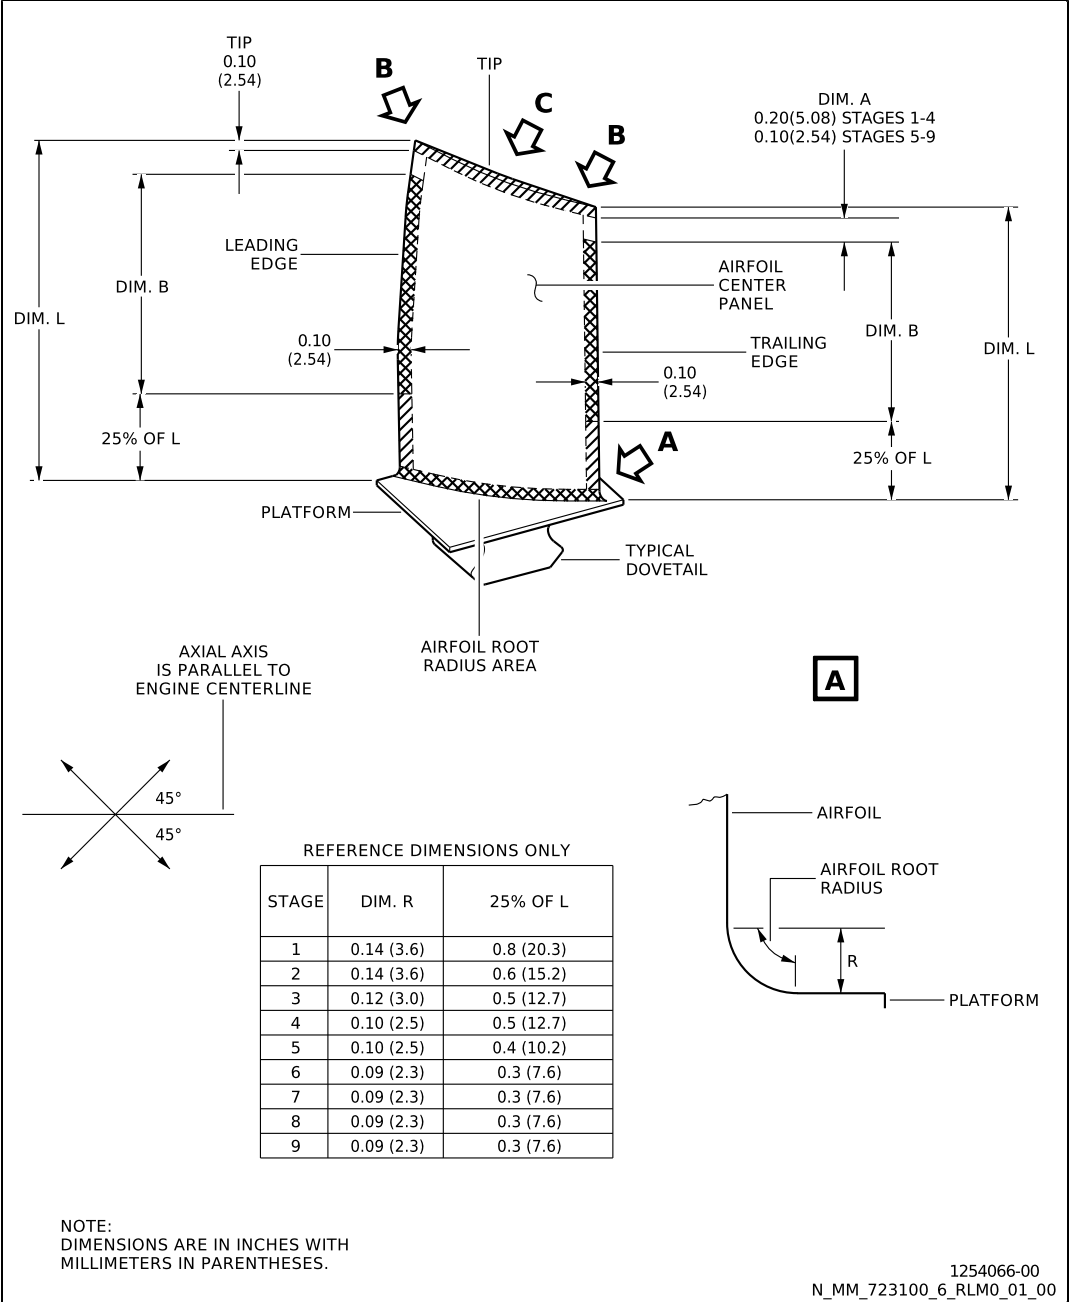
A (SHEET 1/3) - Compressor Blades Inspection
